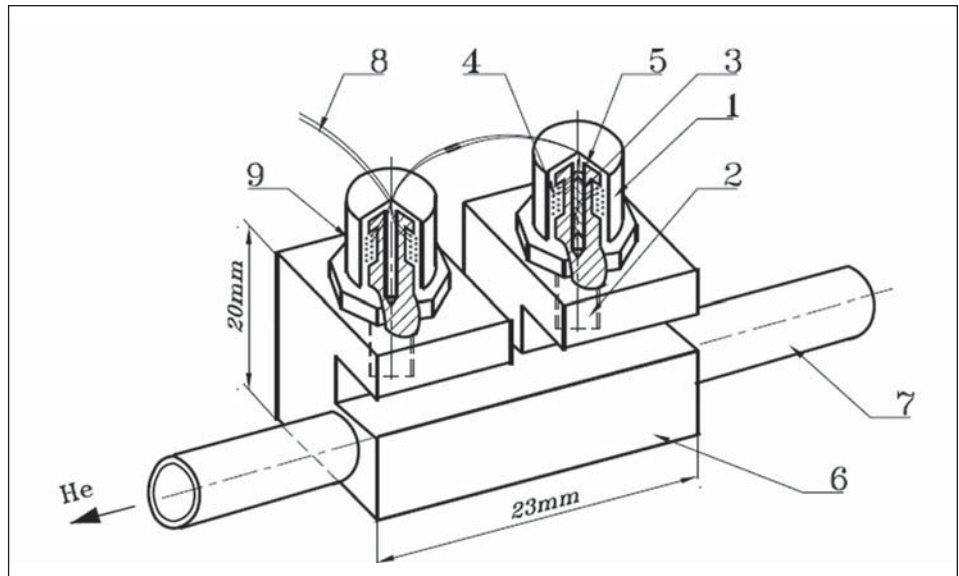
Thermometer mounting fixture on external surface of helium cooling tube.<sup>[4]</sup>
